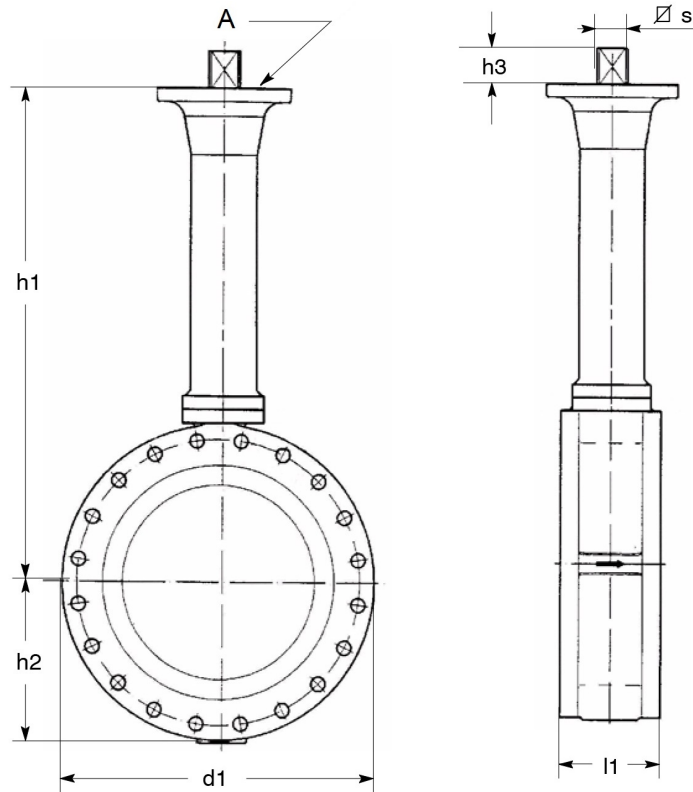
Sectional drawings of TRIODIS 150 CRYO - T7
